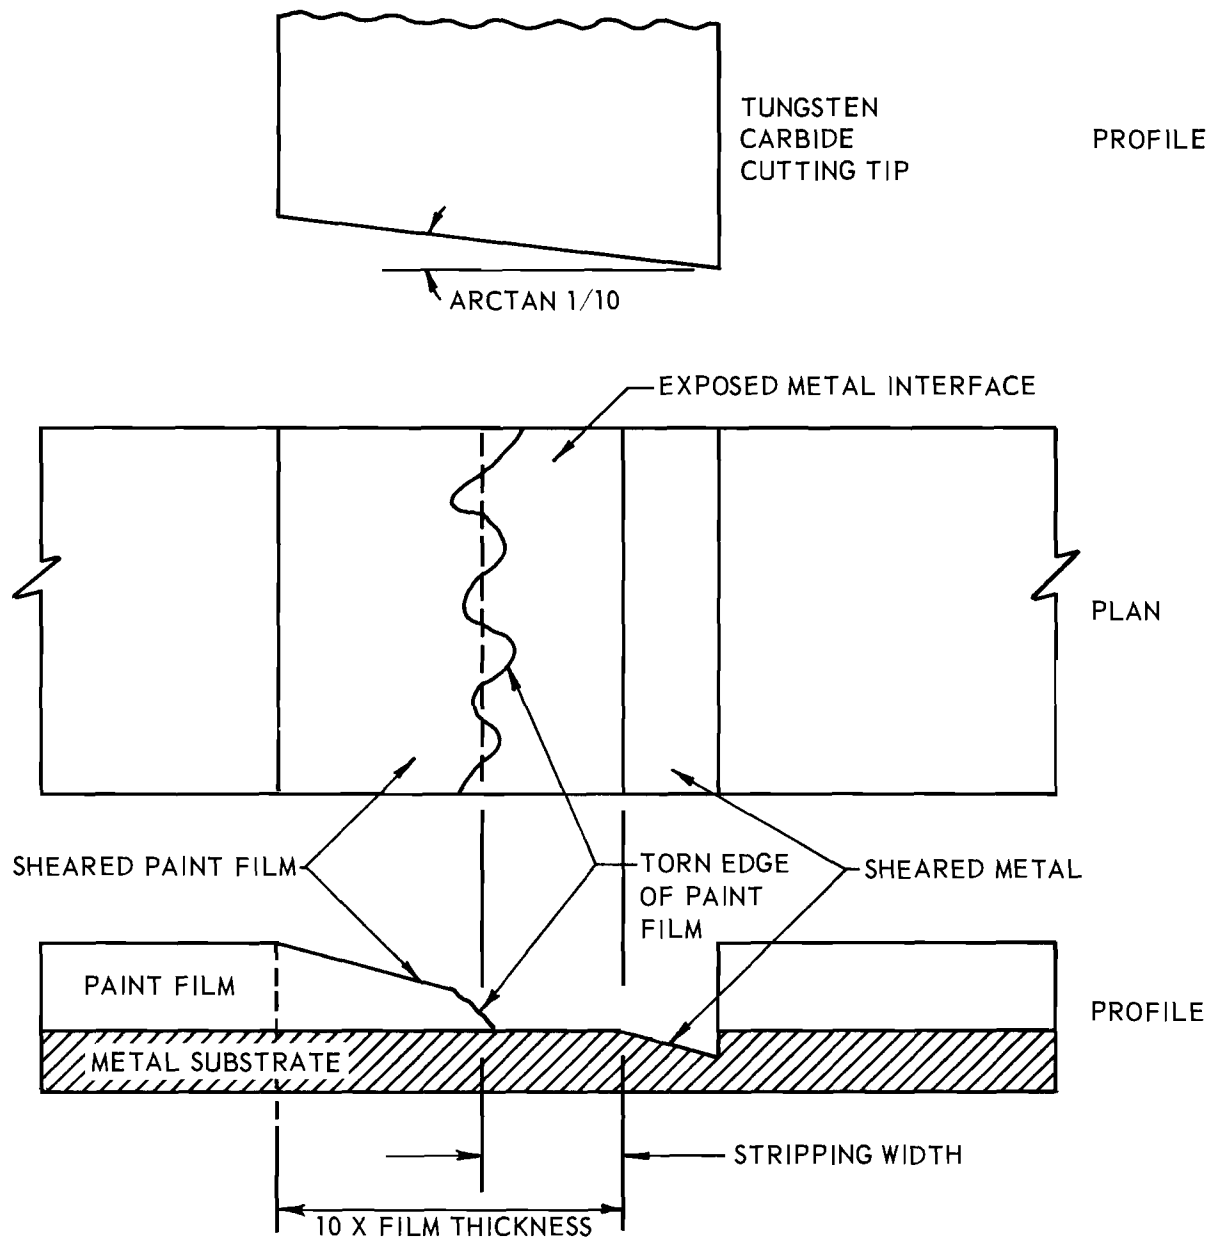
Scribe Made with Paint Inspection Gage Showing Stripping Width.
